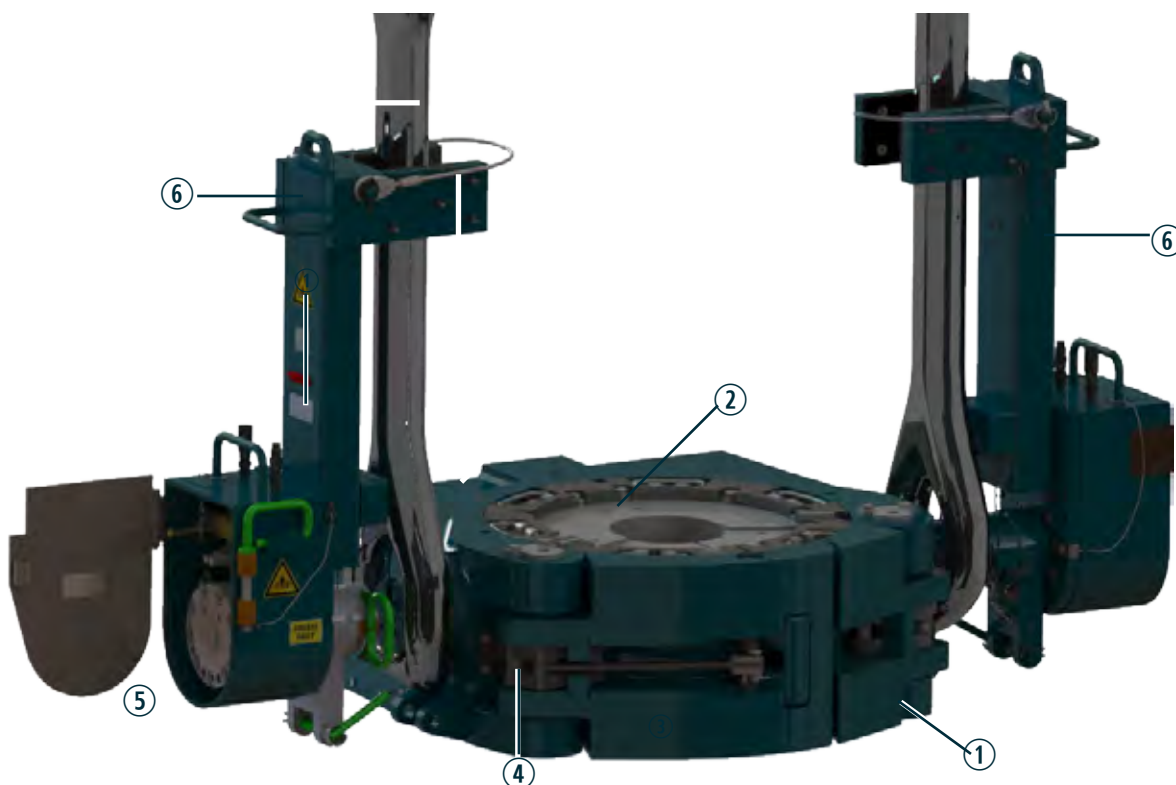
VES SD with double Rotator Assembly (VES-SD 500-3)
